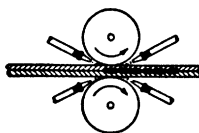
Seam-welding electrodes with water cooling.
